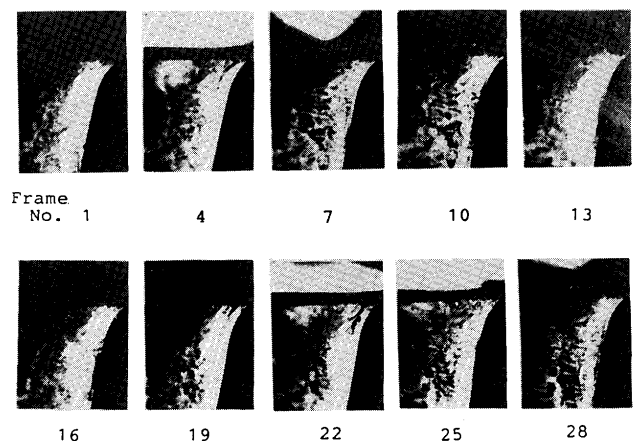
Periodical change at the upper part of the beam hole during laser welding of glass.
